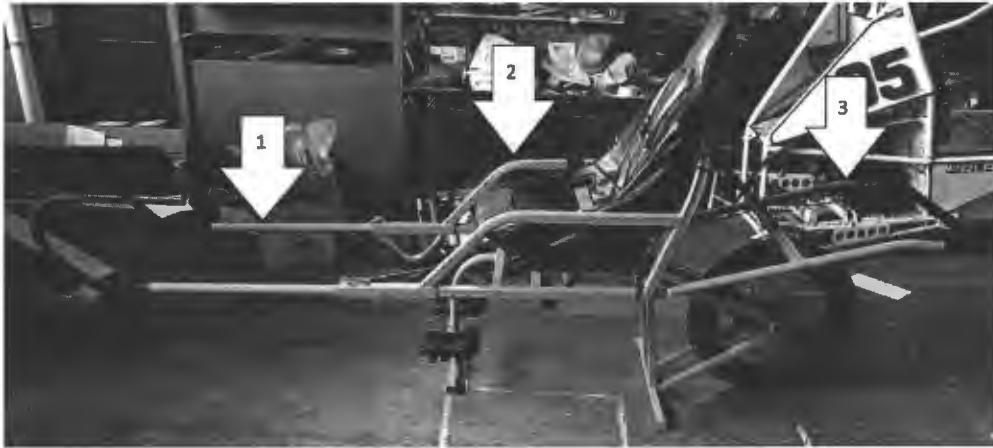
The frame subsystem: (1) the detachable front handles, (2) the seat assembly, and (3) the adjustable rear handles.
